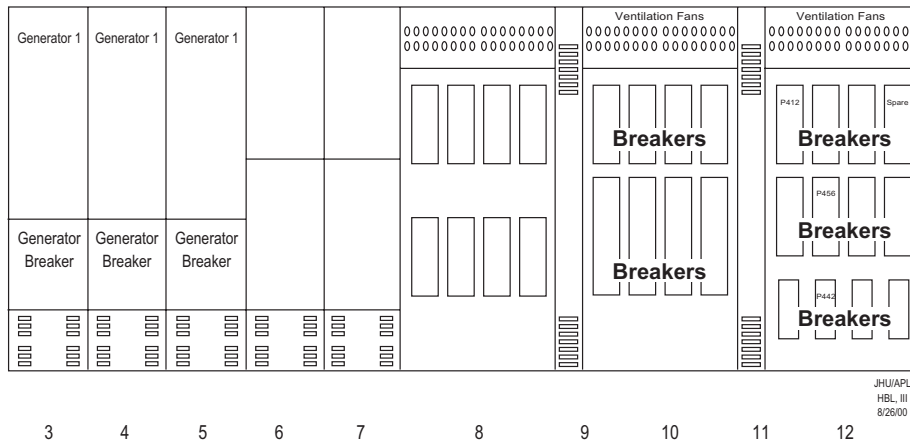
Outline view of main switchboard showing arrangement of units 3 through 12.
